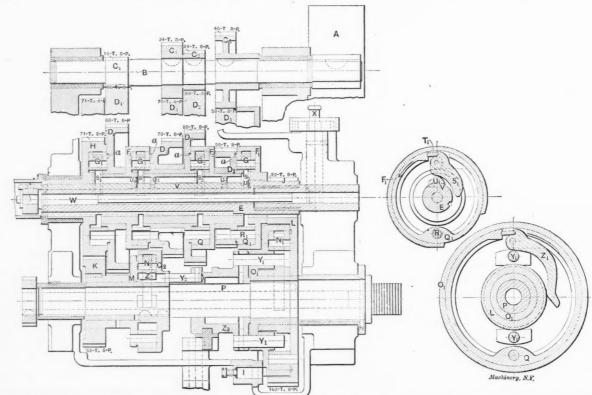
Head-stock Spindle for Whitcomb-Blaisdell Lathe showing the Gearing, and the Positive-action Friction Clutches which control the Speed Changes
